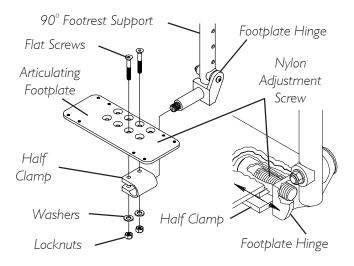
INSTALLING/ADJUSTING ADJUSTABLE ANGLE FLIP-UP FOOTPLATES
